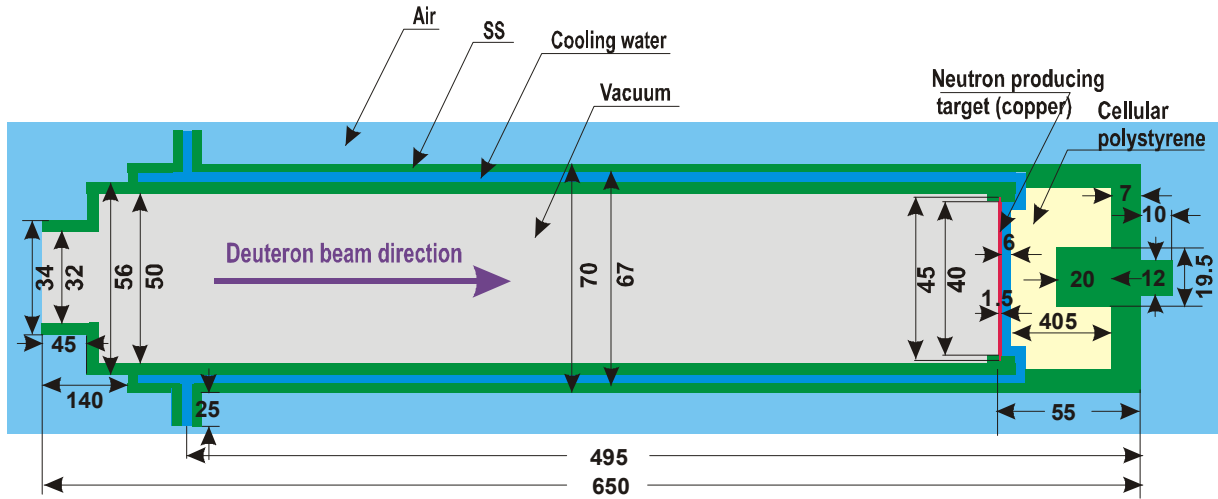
Deuteron Beam Tube Design, Dimensions in mm
